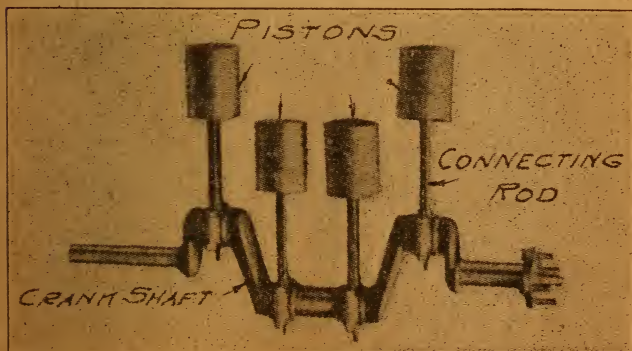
Crankshaft, connecting rod and piston assembly for a four-cylinder engine.
